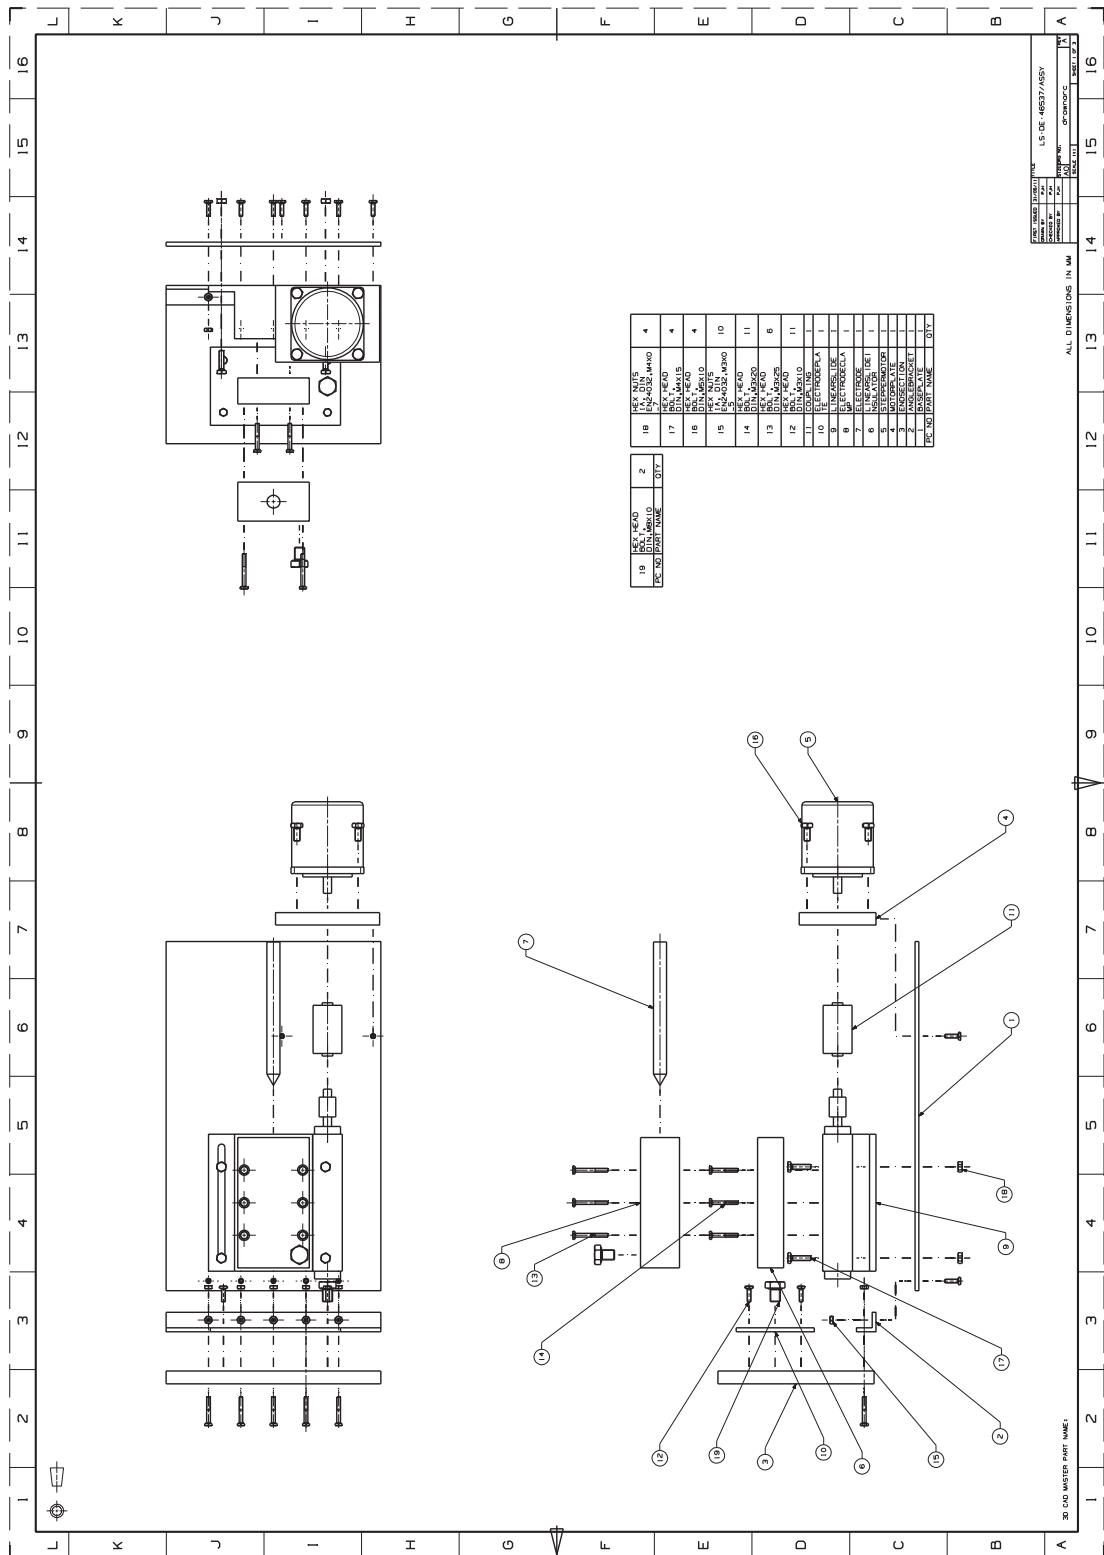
Drawn Arc Generator Assembly Diagram (Third Angle Projection)
